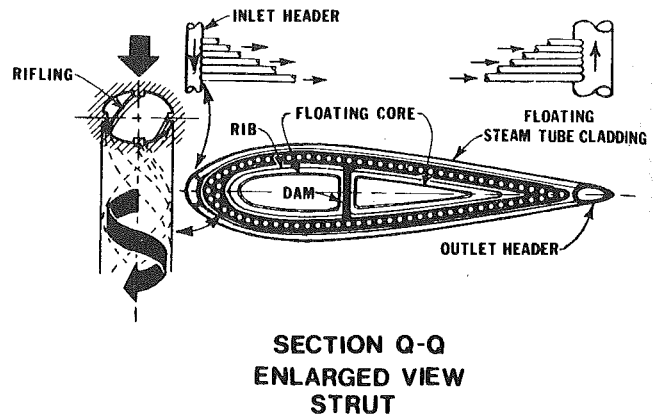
Cross section of steam-cooled strut showing outer-steam shield and inner-steam riflings
